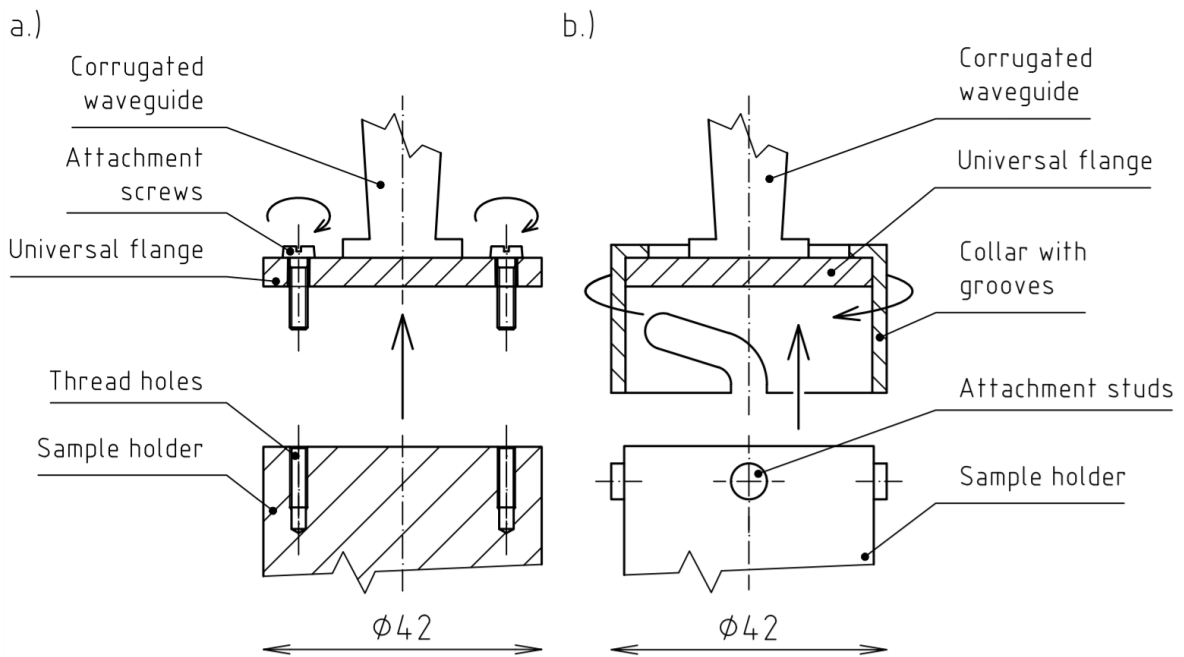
Sample holder mount concepts: a.) Attachment by screws; b.) Bayonet mechanism.
